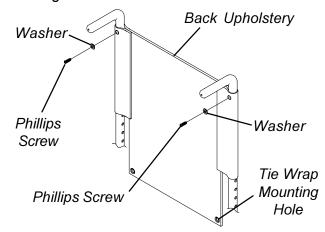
BACK UPHOLSTERY REMOVING/INSTALLING OPTIONAL BACK
